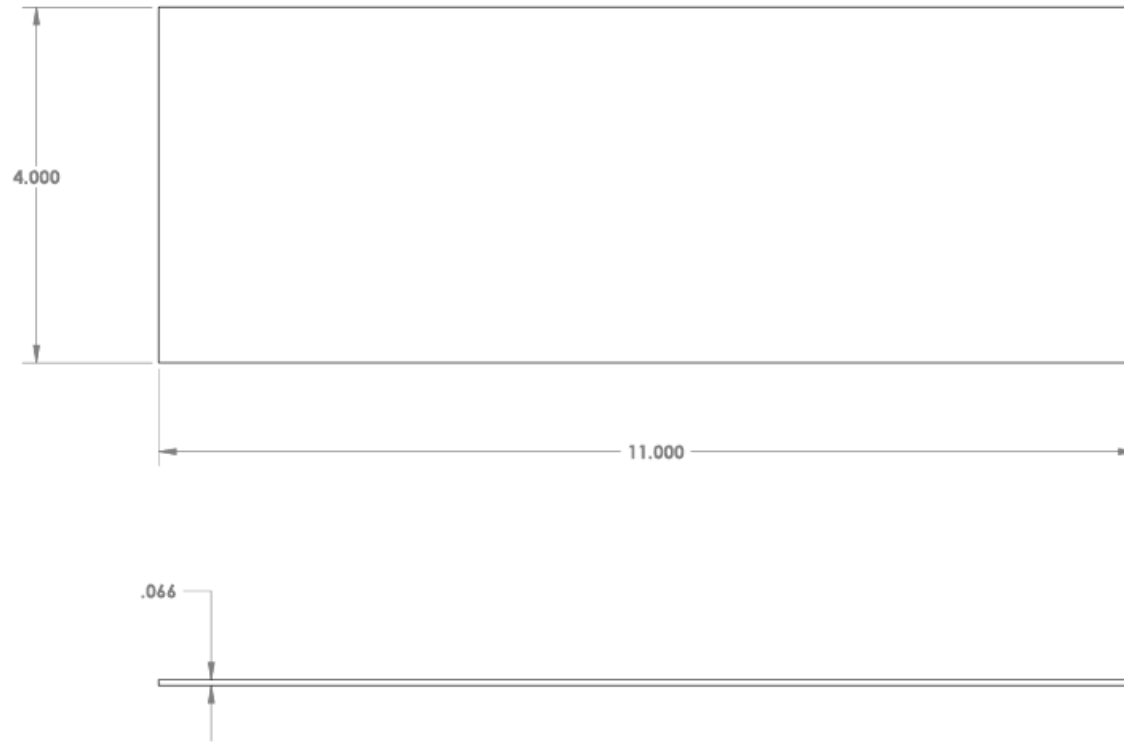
900 TOP PRINTER PRINTING BLANKET
